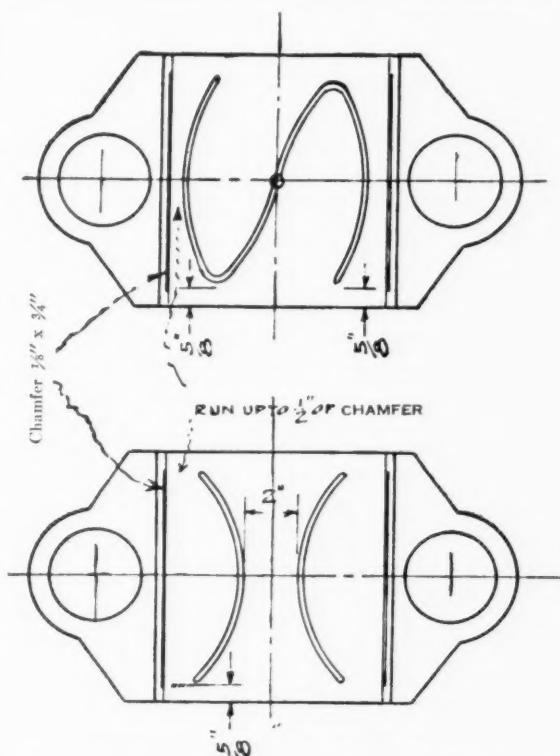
Dimension details of marine type crosshead bearings showing manner of grooving, and chamfering of bearing edges. In this bearing grooves are approximately $\frac{1}{4}$ " wide by $\frac{3}{16}$ " deep. Top half is shown above, with the bottom bearing below. In preparing such bearings all burrs must be removed and grooves eased off at the ends.
